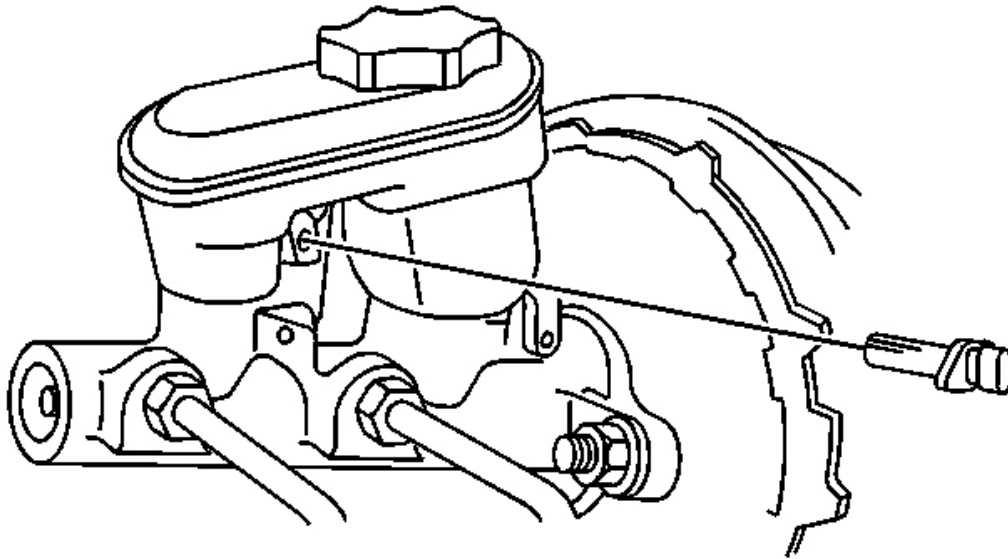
Electrical Connector To Brake Fluid Level Sensor
